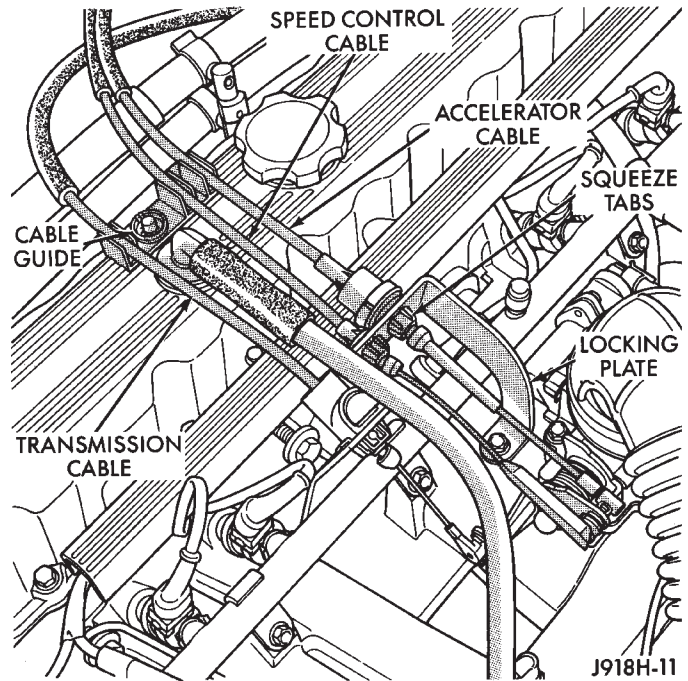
Remove/Install Speed Control Cable to Locking Plate
